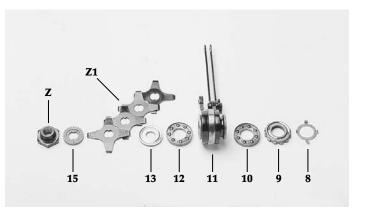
Sequence of parts that fit on servo shaft in front of bridge support *plate.
